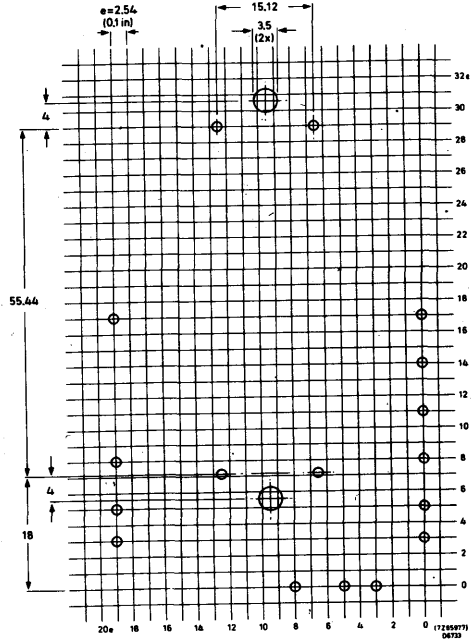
Hole pattern for mounting on a printed-wiring board (solder side)
